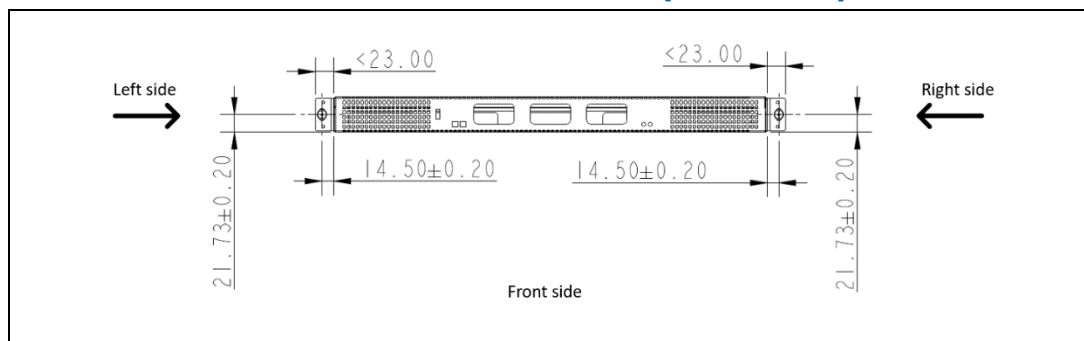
1U Server Chassis Dimensions with Ear (Right-Side View)
